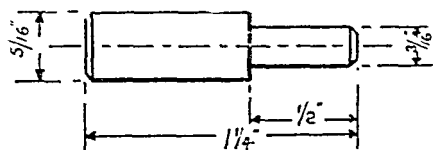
TURNING A BRASS COMPONENT. SINGLE-SPINDLE AUTO. WORK
